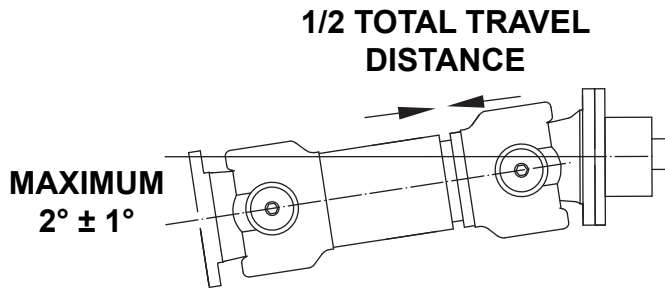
DIESEL ENGINE OFFSET ANGLE & SPACING
